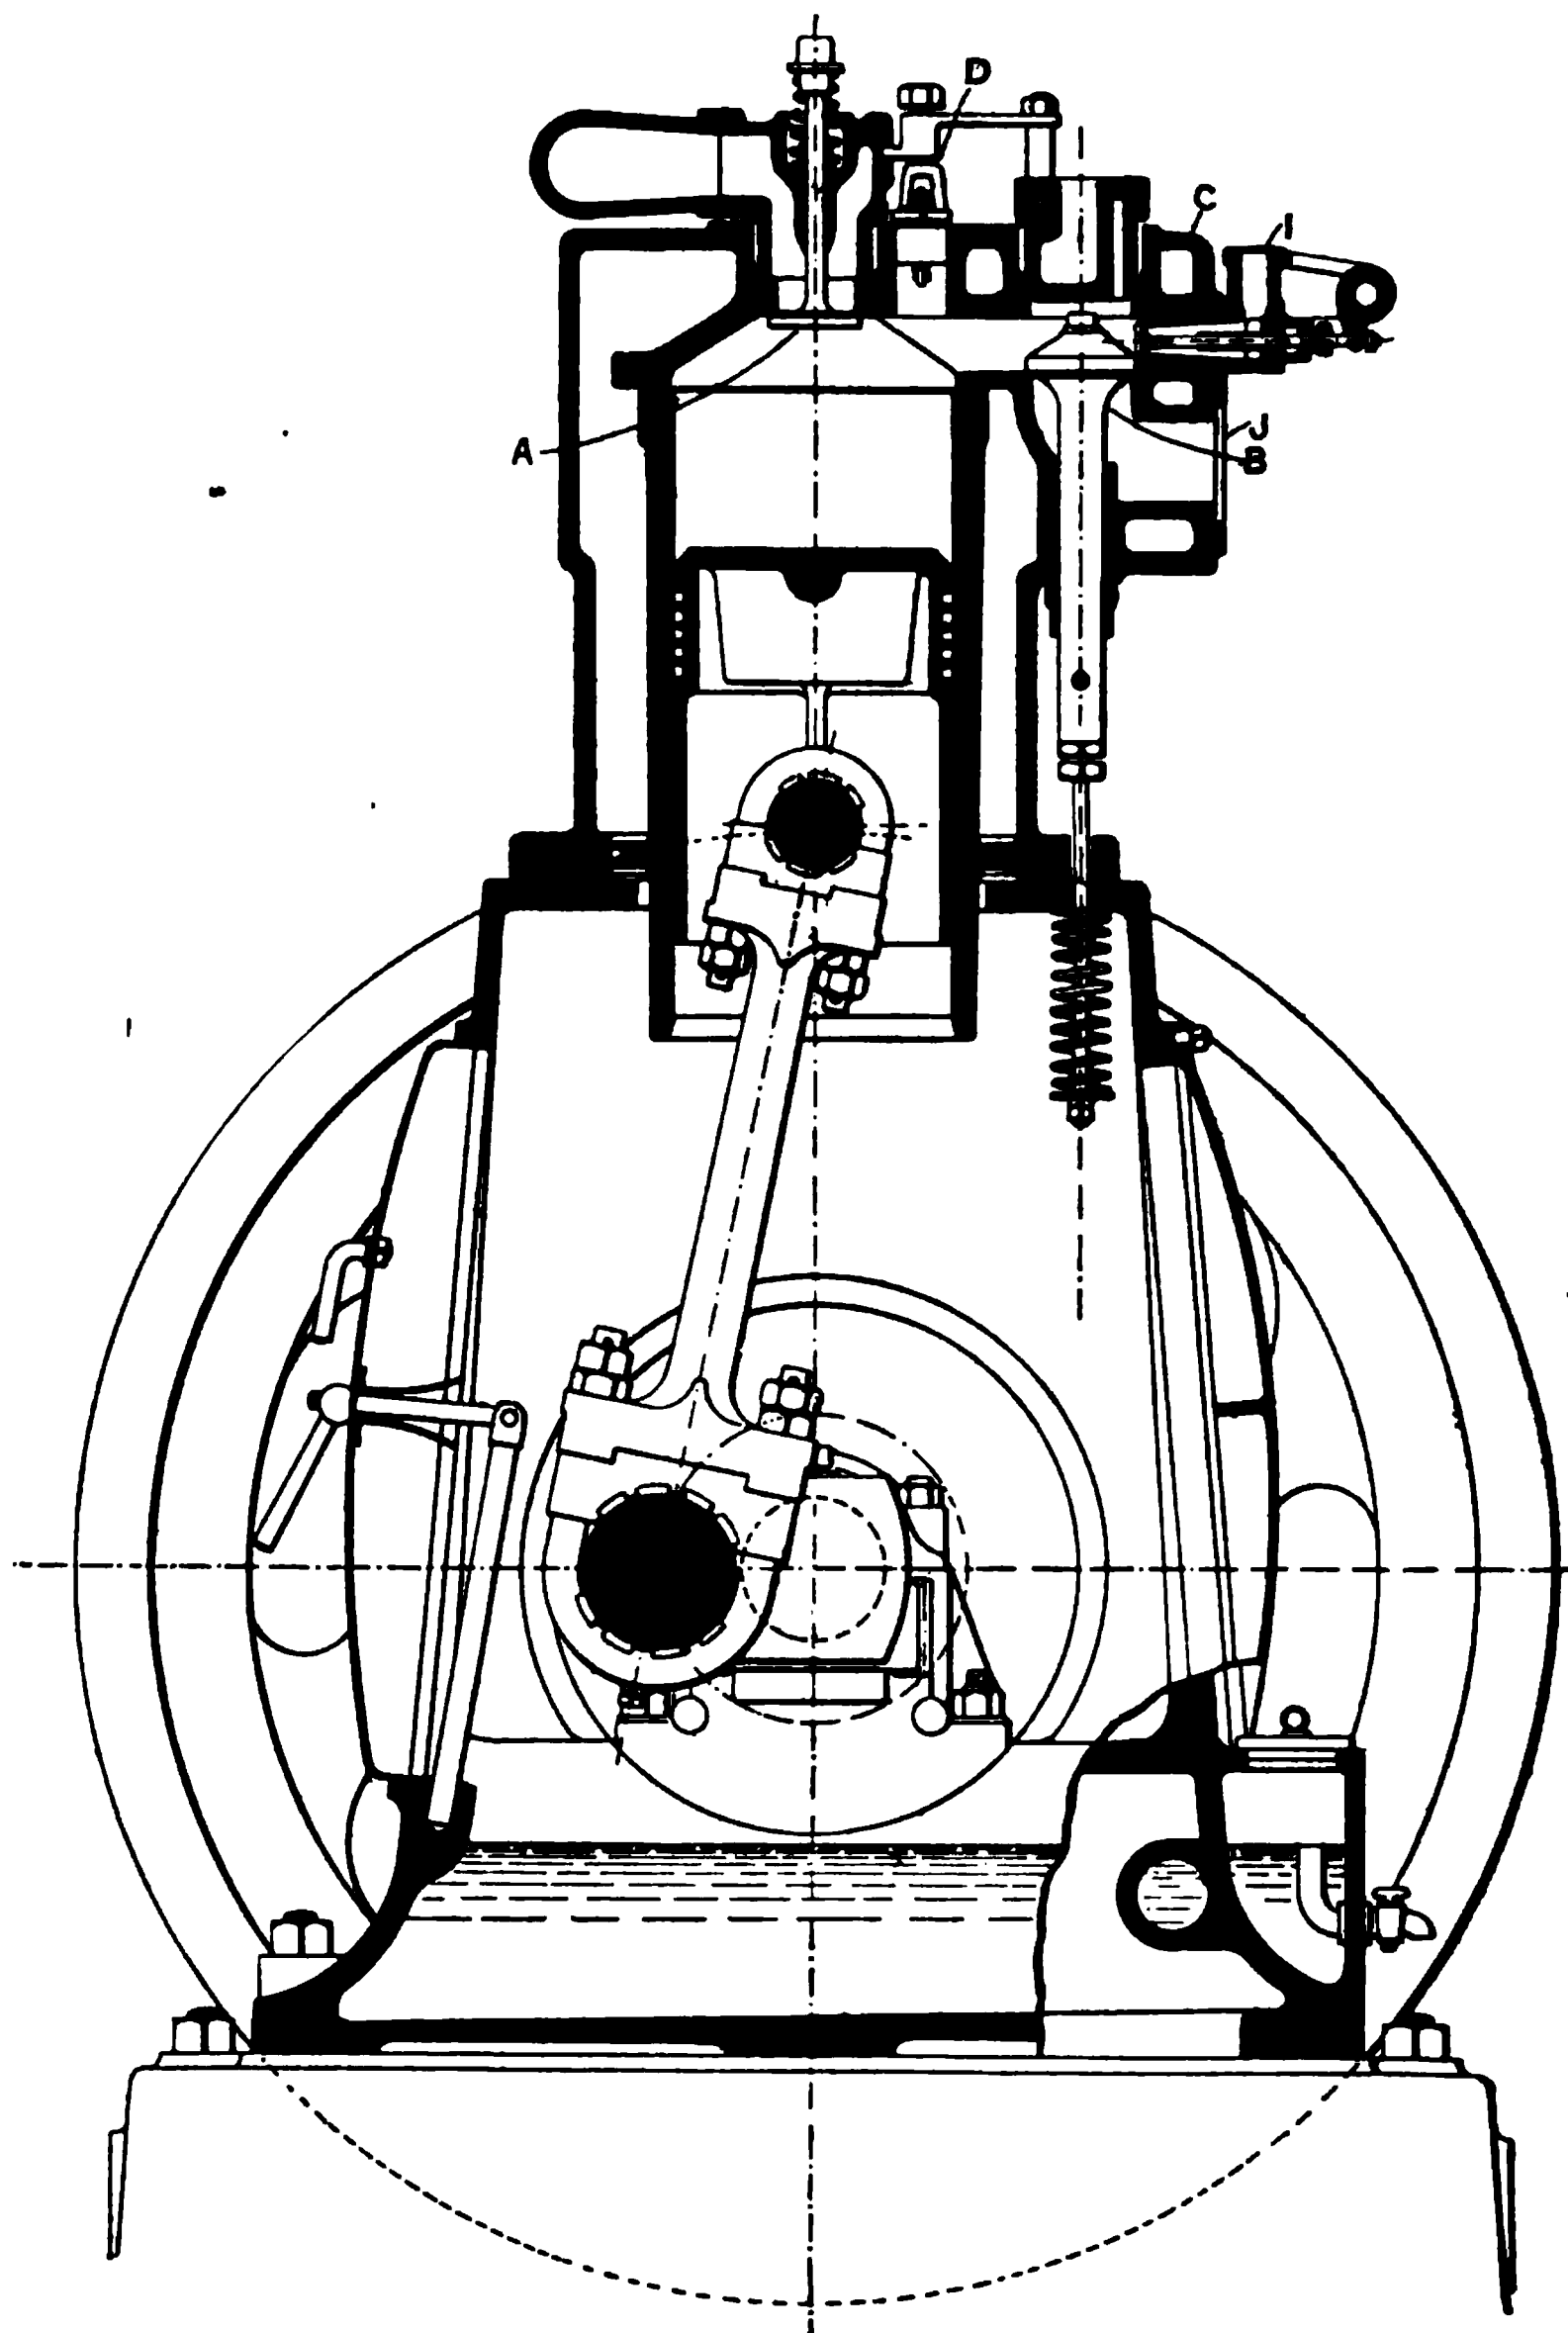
150-H.P. Four-cylinder Fielding & Platt Engine—Sectional Elevation.
